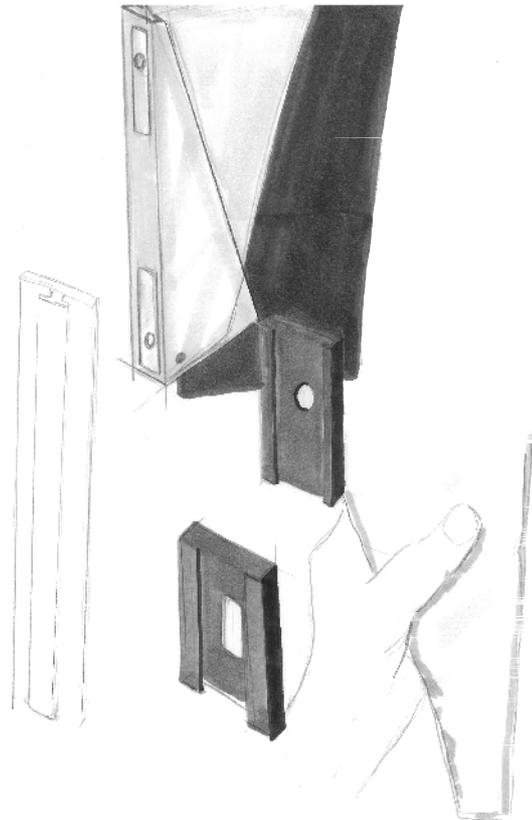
Another attachment principle, where the package is attached by rotating a handle 90 degrees, screw to fasten.
